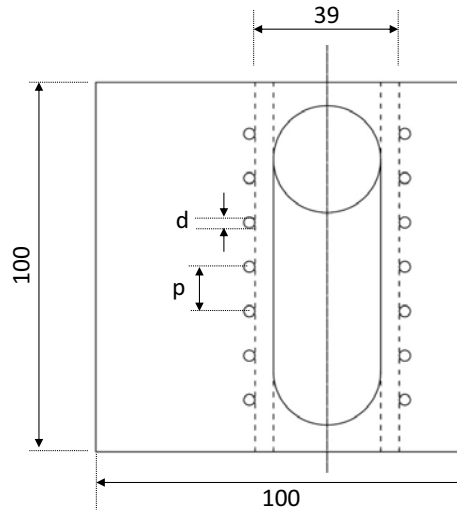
Sketch of the aluminum sheet highlighting the position of the holes with respect to the weld seam
